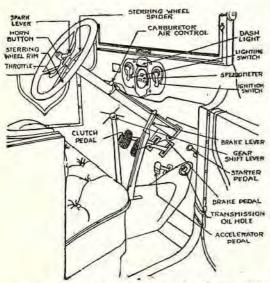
Hupmobile instrument board and gear shift. Firing order, 1, 2, 4, 3. Gear shift is the S. A. E. standard three-speed gear shift.
